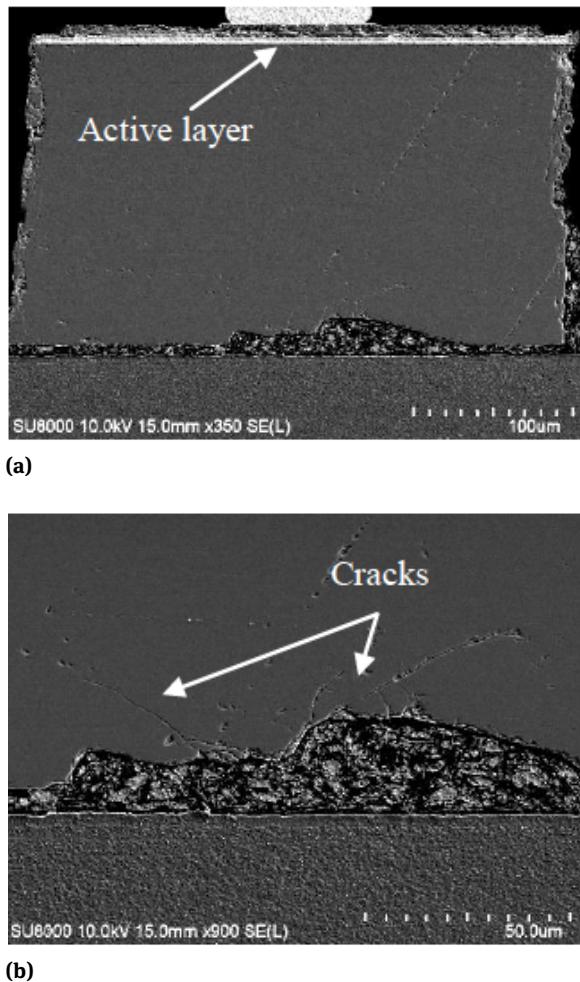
Cross-section view of the units after TC test showing cracks. (a) Cross-section view showing active layer of die and crack formation. (b) Detail view of cracks at the bottom of die substrate.
